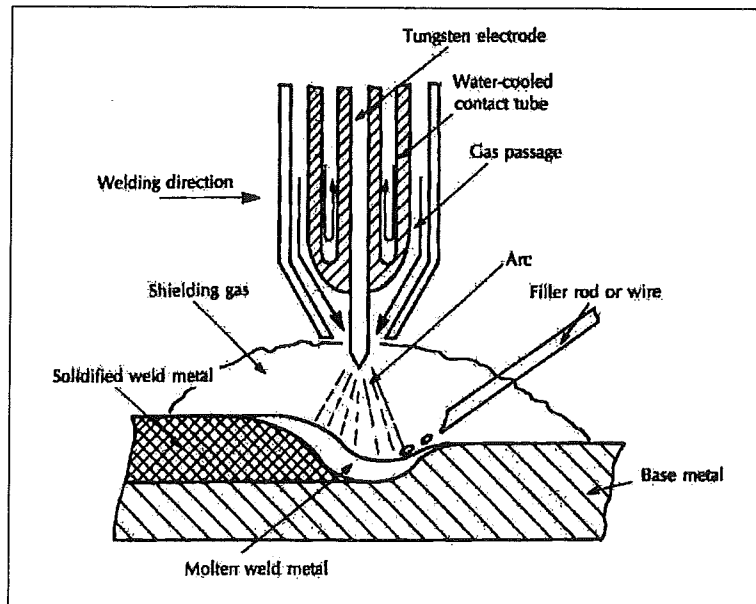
Schematic diagram of TIG welding set up [6].
